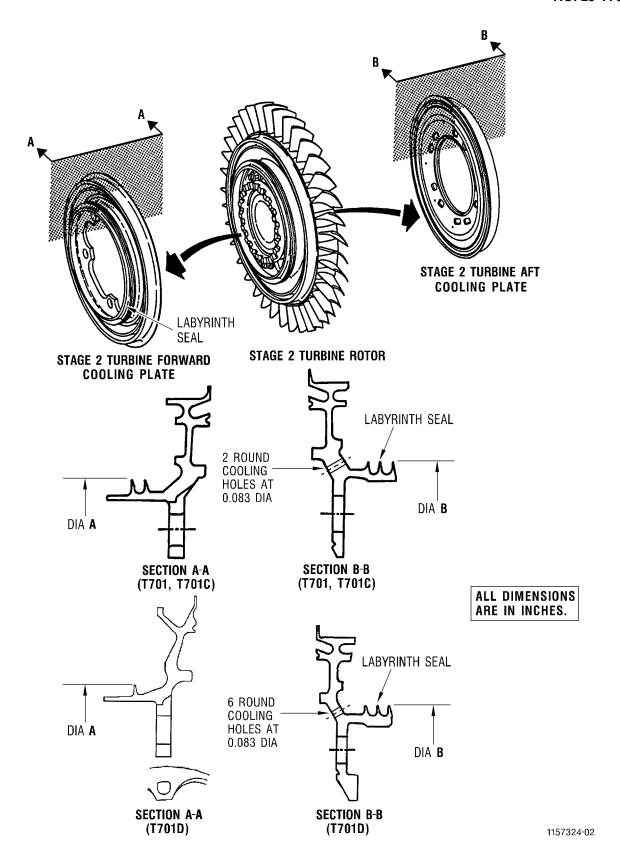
(T701, T701C, T701D) Labyrinth Seals for Wear; Inspection (Sheet 2 of 2)
